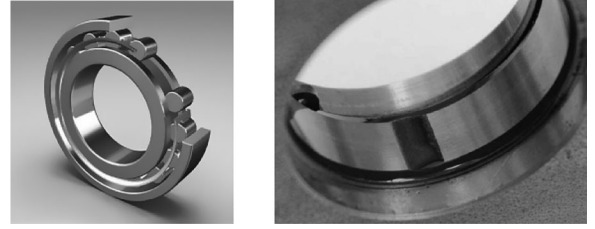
Cylindrical-roller bearing (left) and bearing damage of faulty group 2 in outer race (right).
